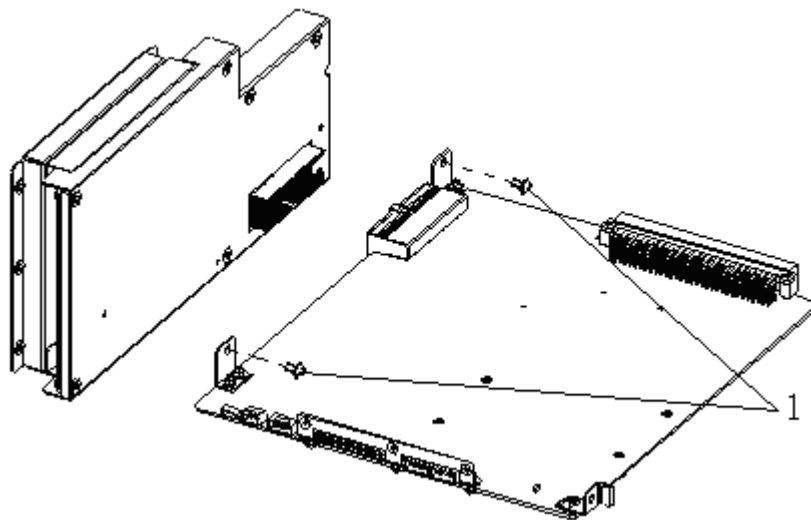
Sketch Map of Probe Board and Main Board Disassembly (4)
